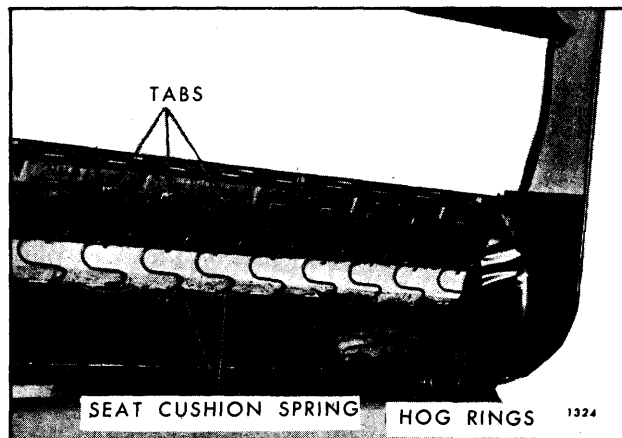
Seat Cushion-to-Back Spring Attachment
